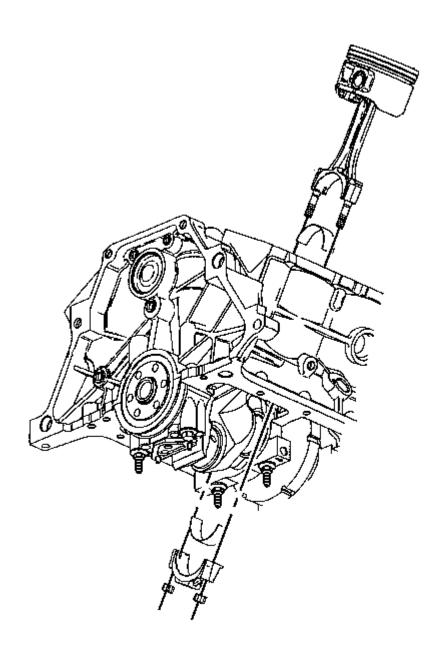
Removing Crankshaft Oil Deflector Courtesy of GENERAL MOTORS CORP.
